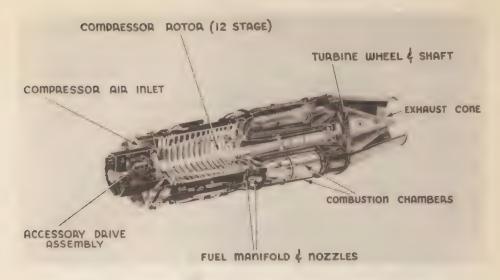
A cutaway drawing of the General Electric J47 turbojet engine.
